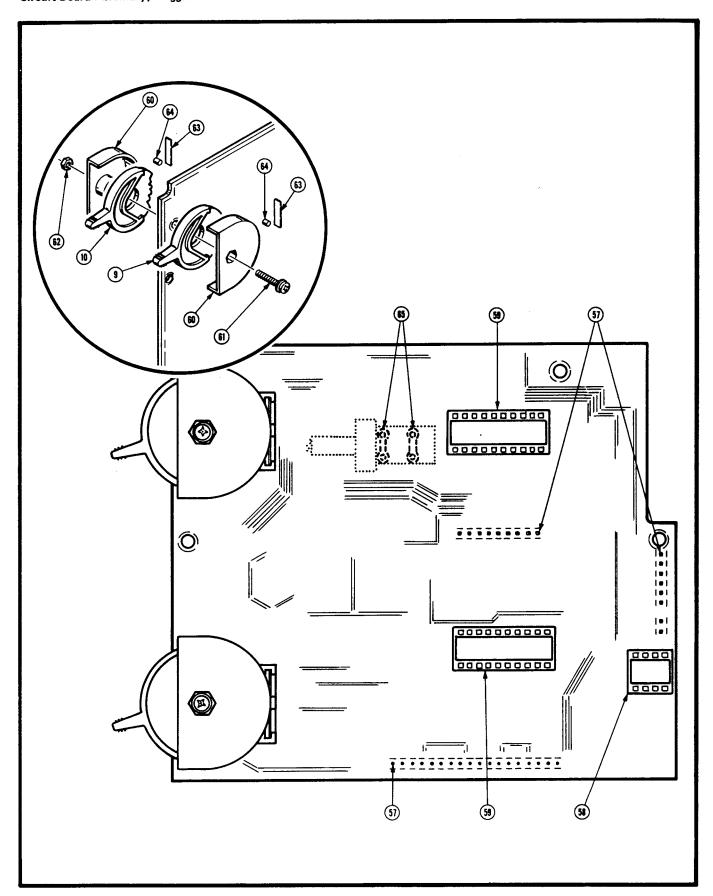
Circuit Board Assembly, Trigger (Sheet 3 of 3).
